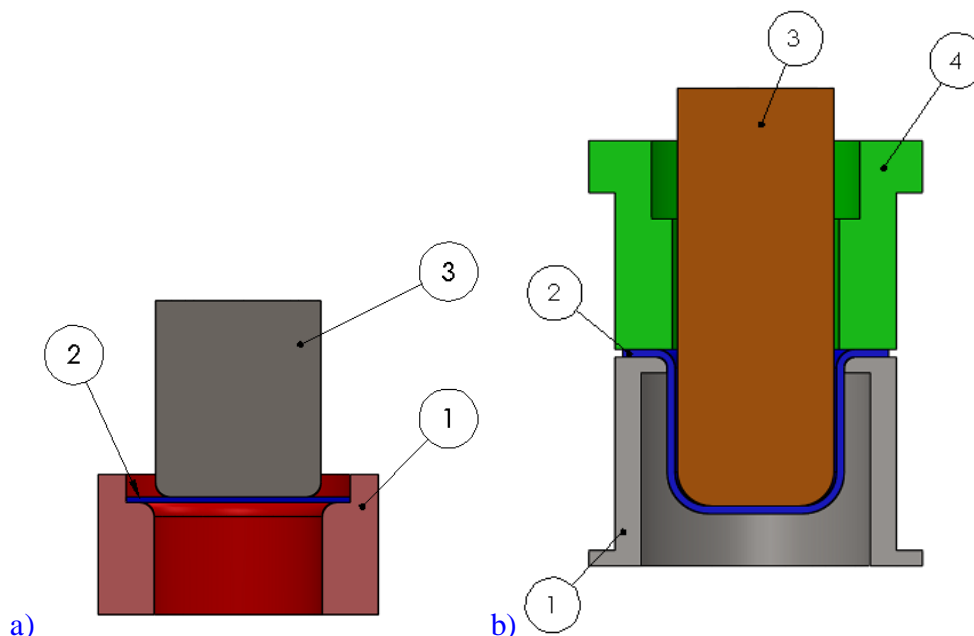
a) Deep drawing without the holder of the sheet, 1 – Die, 2 – Sheet metal, 3 – Punch; b) Deep drawing with the holder of the sheet, 1 –Die, 2 – Sheet metal, 3 – Punch, 4 – Holder of the sheet.
